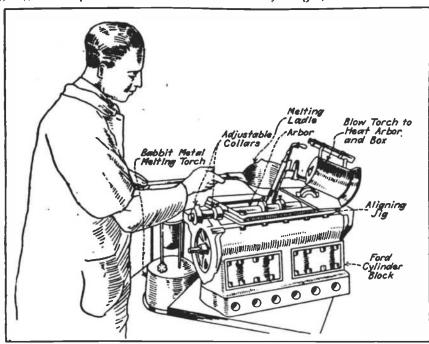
Showing method of pouring bearing metal in the main bearings in cylinder block of Ford engine showing use of mandrel and aligning fixture
